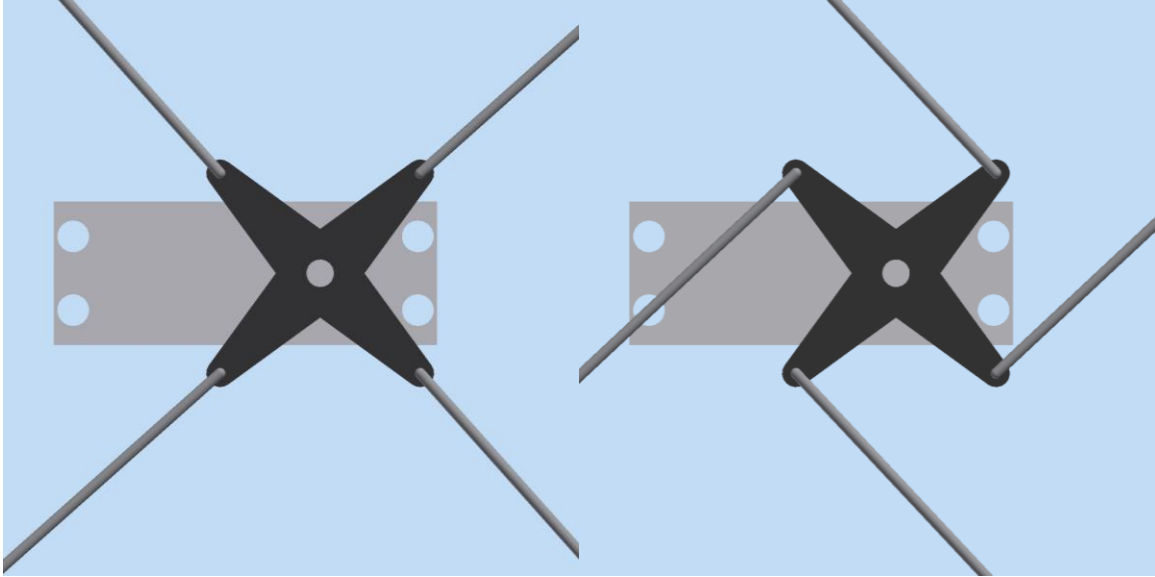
Wireframe drawing of leg hinge – Position 2.
